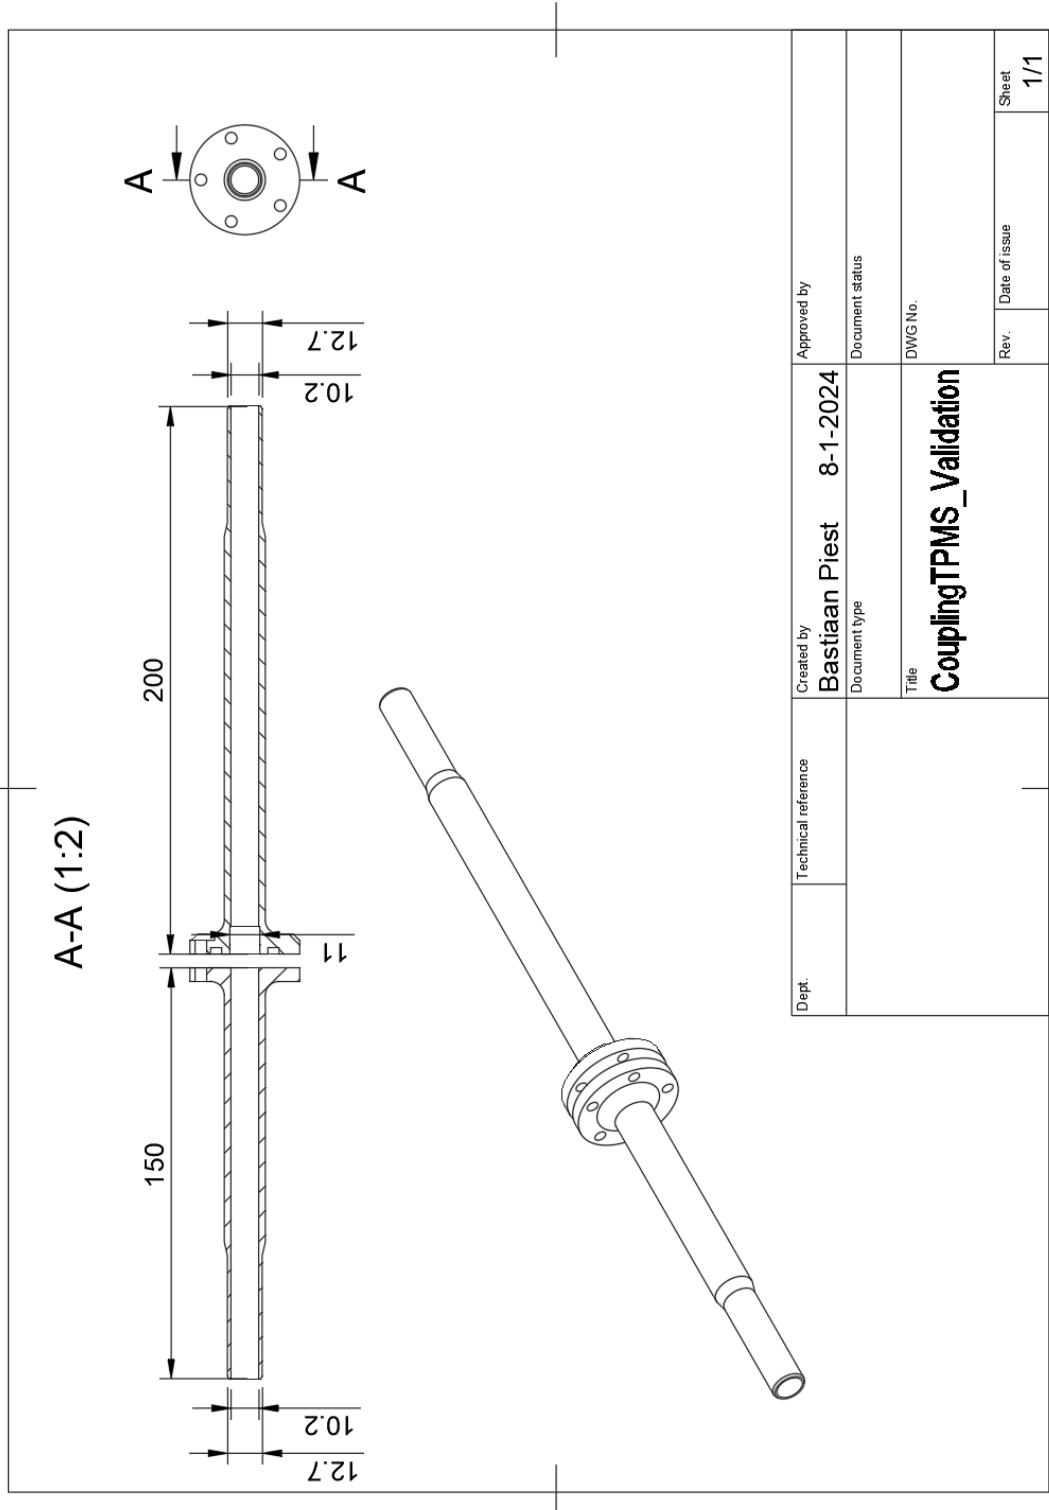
Technical drawing of the sudden expansion experimental set-up with some important dimensions.
